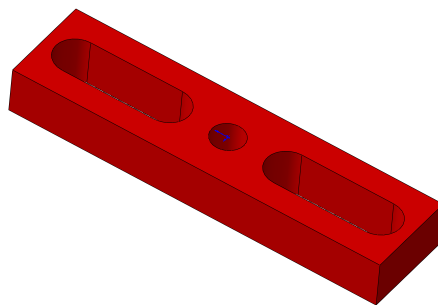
Vacuum seal support foot, for variable positioning of the support pieces (fig. B.13 and fig. B.14) on the plate.
